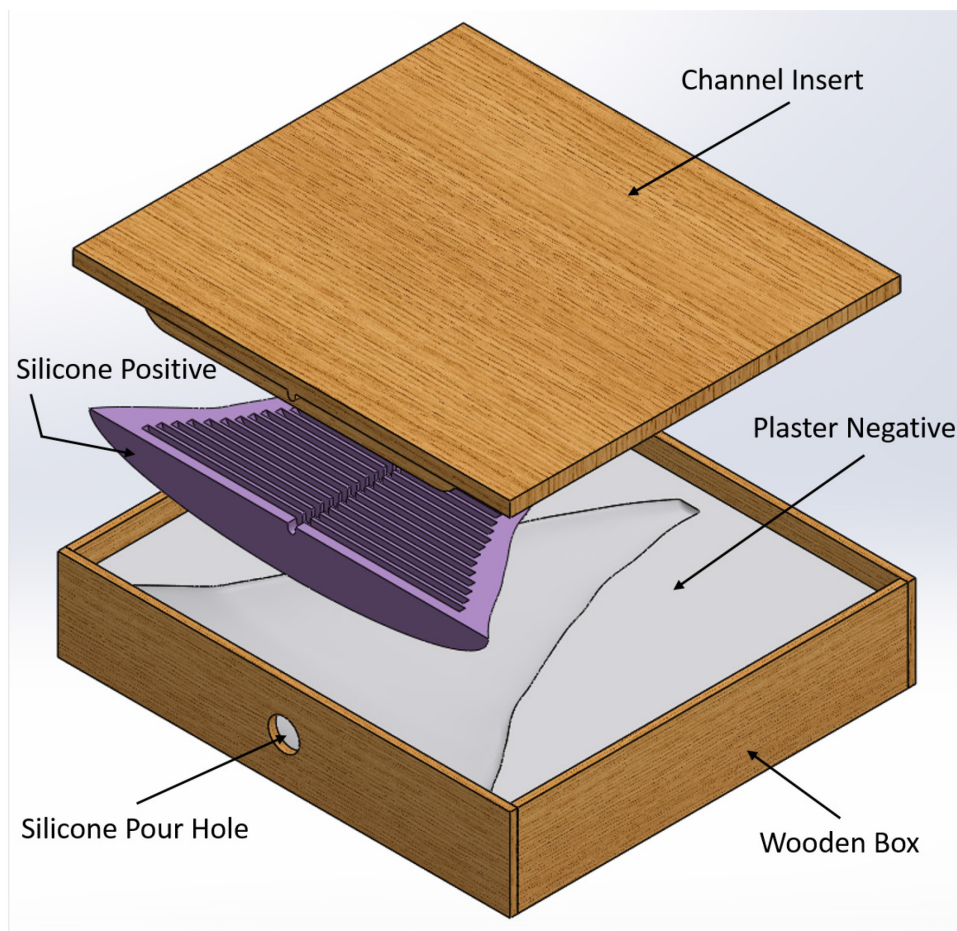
EXPLODED VIEW OF PLASTER MOLD
